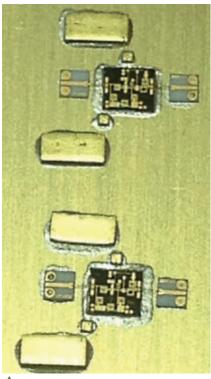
Die plate assembly for testing the GaN LNA with bond wire interconnects.
